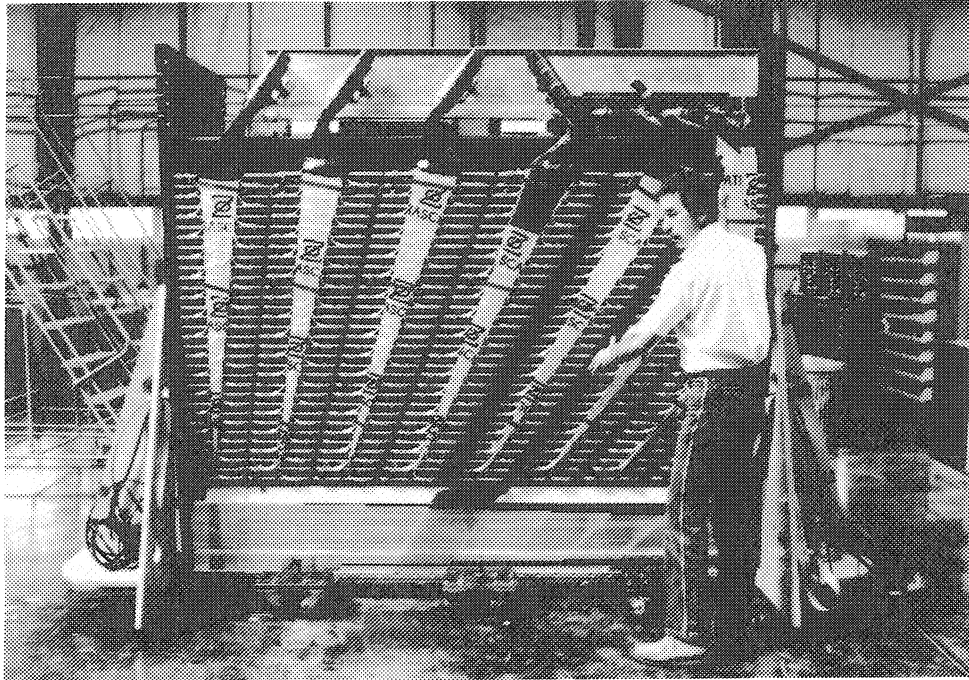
Side view of one wedge module with side skin removed exposing the tower structure
